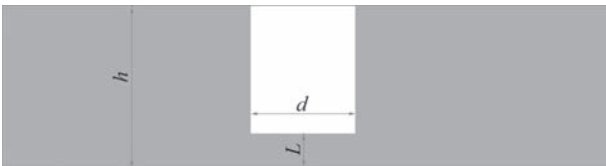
Scheme of defect location in welded specimen: h — thickness of specimen; d — diameter of hole; L — depth of occurrence (wall thickness remaining after drilling a blind hole with a diameter d)
